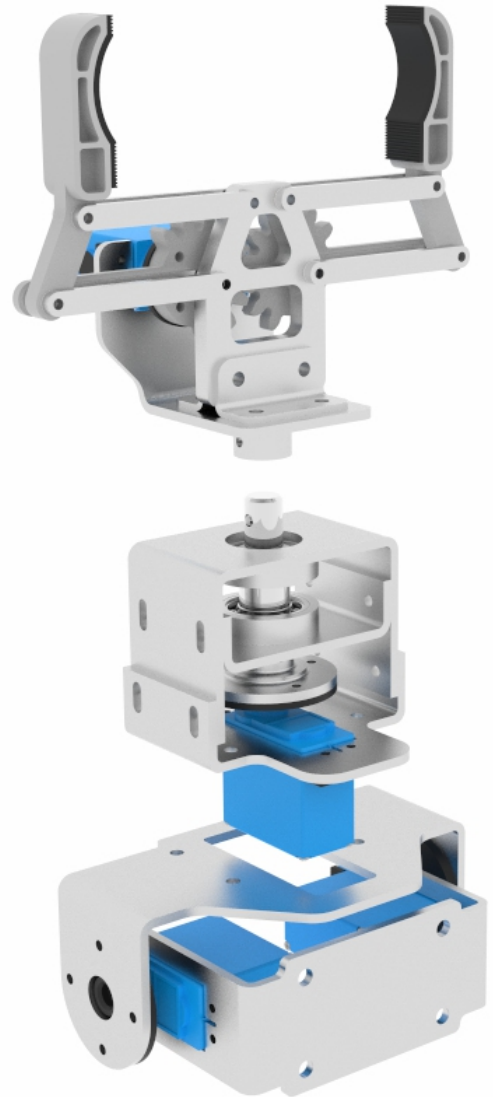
Exploded view of the Maelstrom manipulator arm
